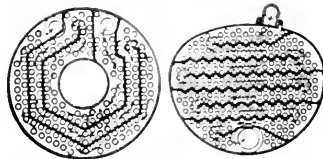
SECTION OF HEATER FRONT AND BACK SECTION.
